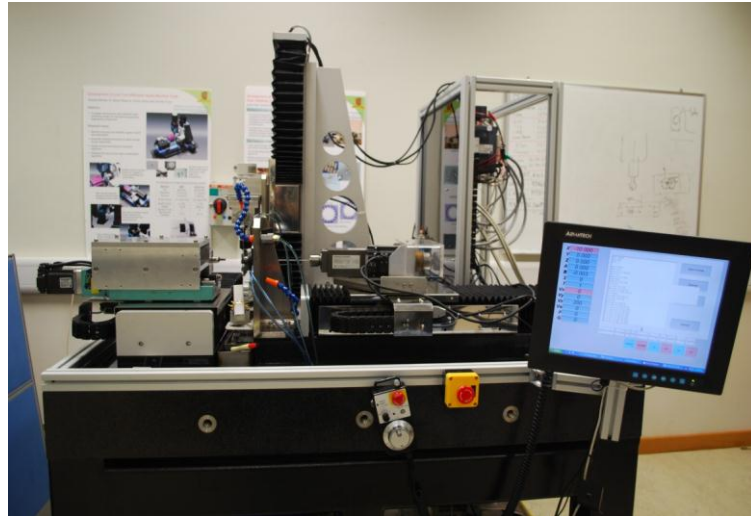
The photo of our CNC Turn-Mill Machining Center
